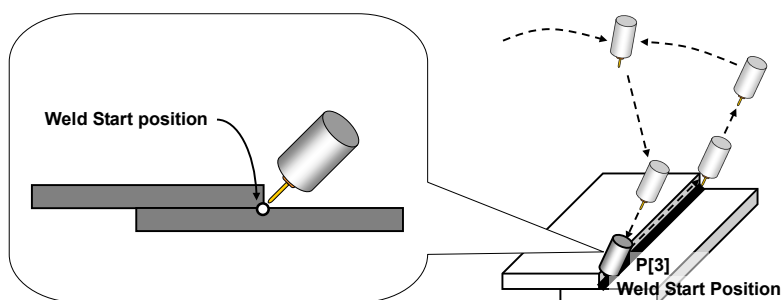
(d) Jog to Weld Start Position
